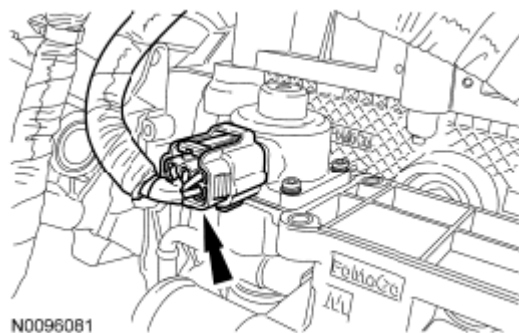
Locating Electronic Throttle Control & Evaporative Emission Canister Purge Valve
